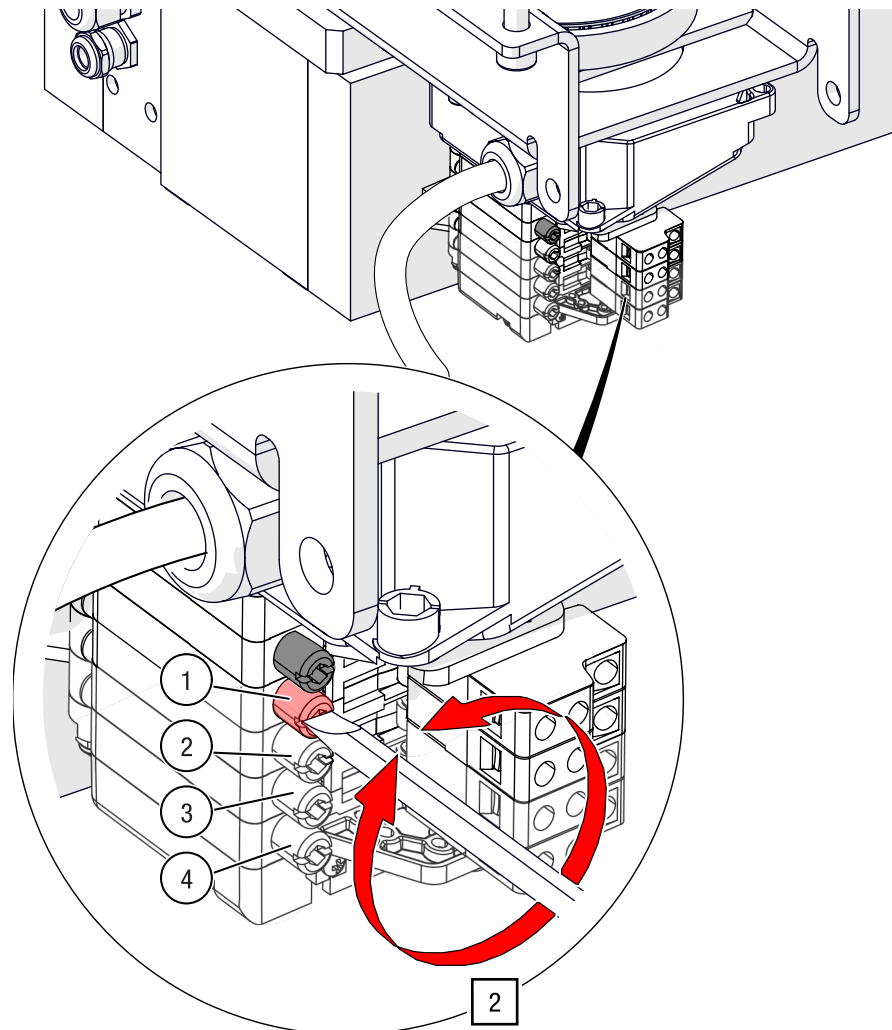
Setting emergency limit switches – Adjust adjustment wheels
